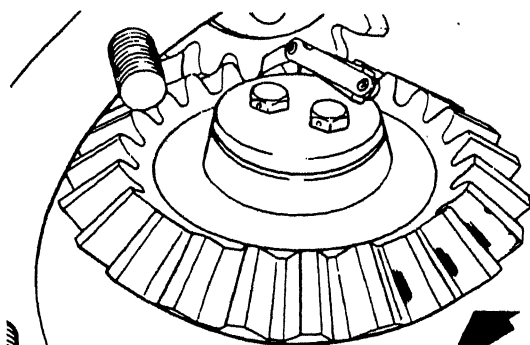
Checking vertical swingshaft bevel gear backlash.
